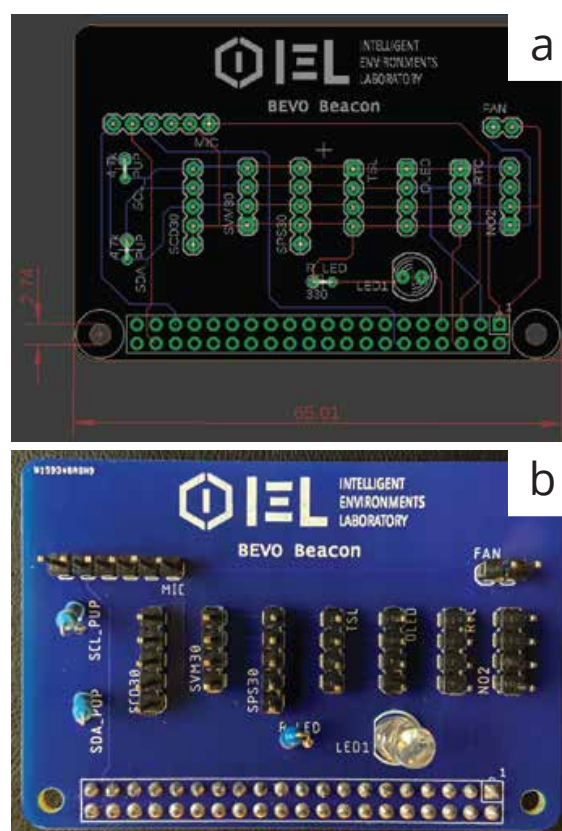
The PCB we developed for the BEVO Beacon: (a) digital schematic and (b) fully assembled.
